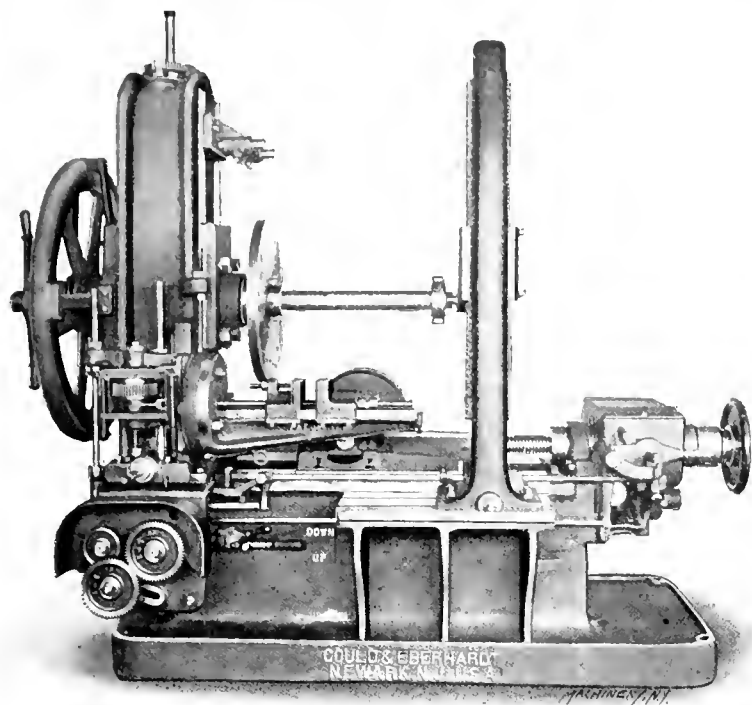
Gould & Eberhardt Spur Gear Machine, with Special Automatic Rim Clamping Device Attached.
